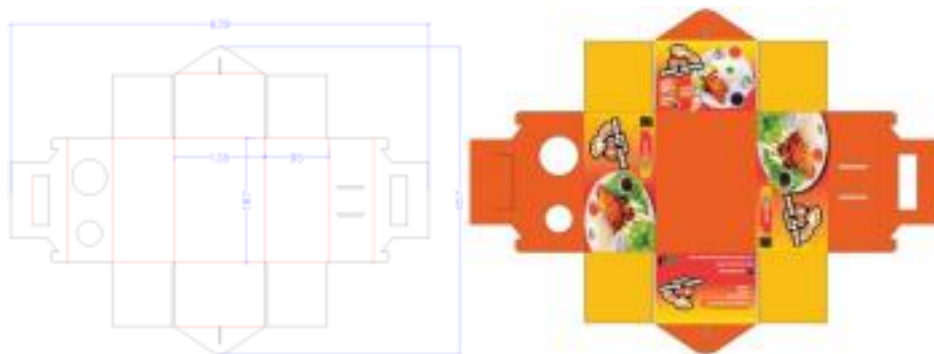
Innovation Secondary Packaging Chicken Rice Technical Drawing.
